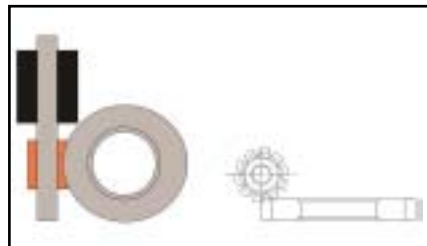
Chamfer hob shifts into cutting position. Hob slide moves to position hob above workpiece and feeds radially to depth.
